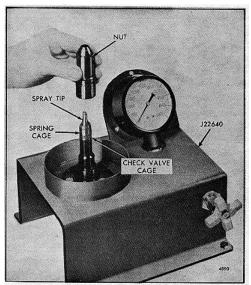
Installing Injector Valve Parts on Auxiliary Tester J 22640
